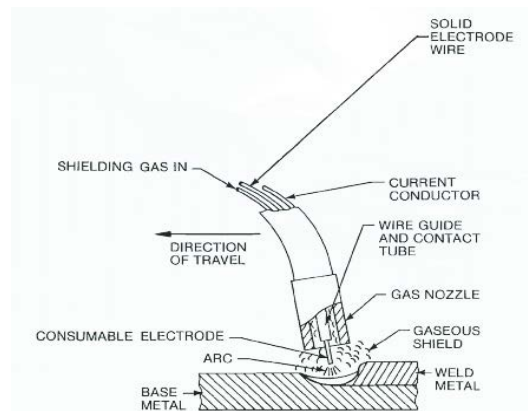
Gas Metal Arc welding process (MAG)
